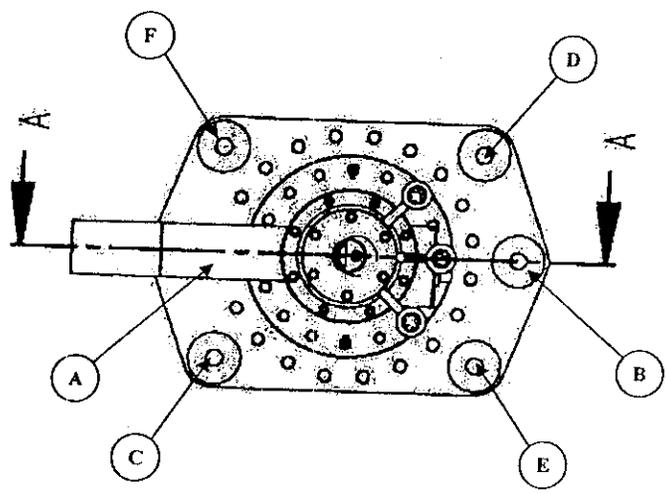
The specified sequence for tightening the Belleville washer assemblies.
